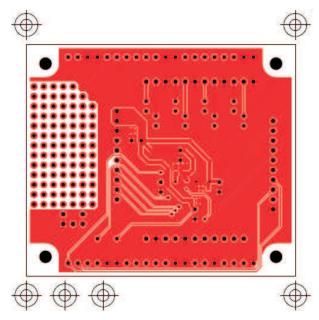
DEM-PCM1780/1781/1782 Bottom View
